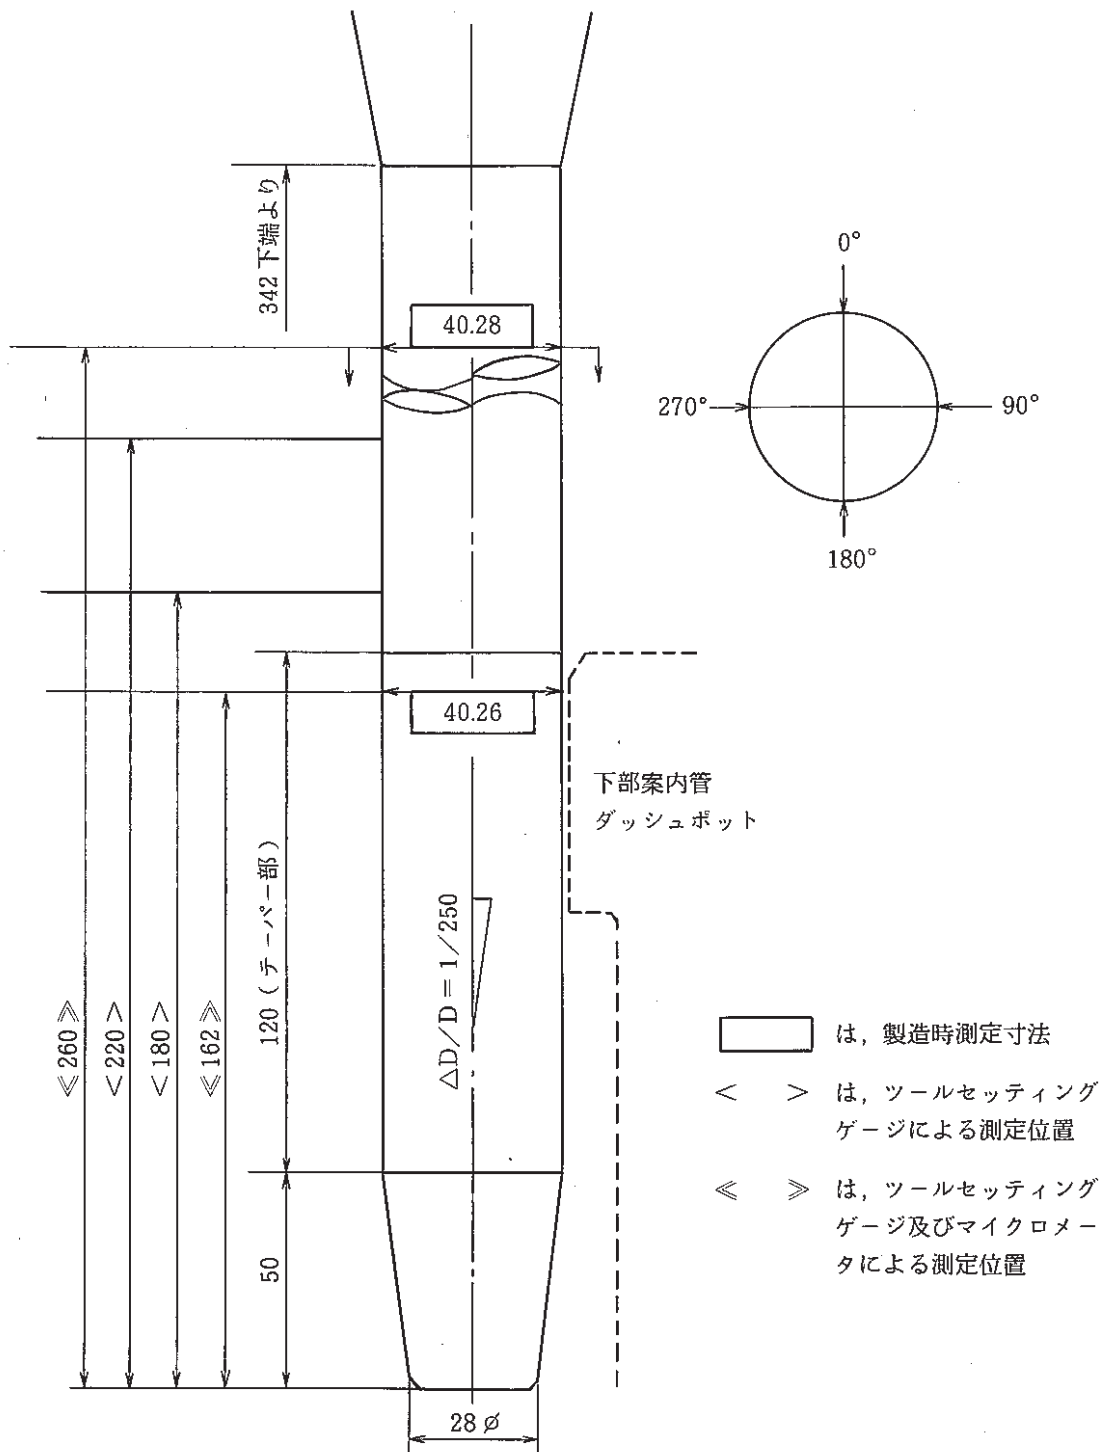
Diameter Measurement Positions by a Toolsetting Gauge and a Micrometer
